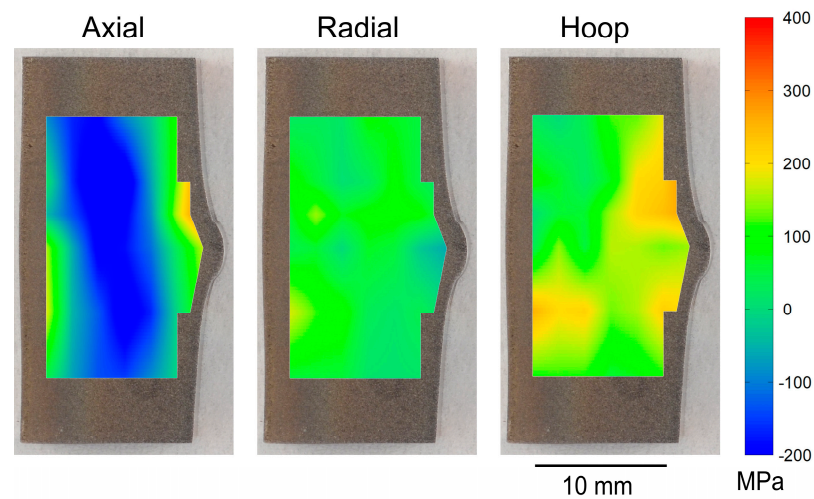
Welding residual stress maps of the welded pipe specimen measured by neutron diffraction.
